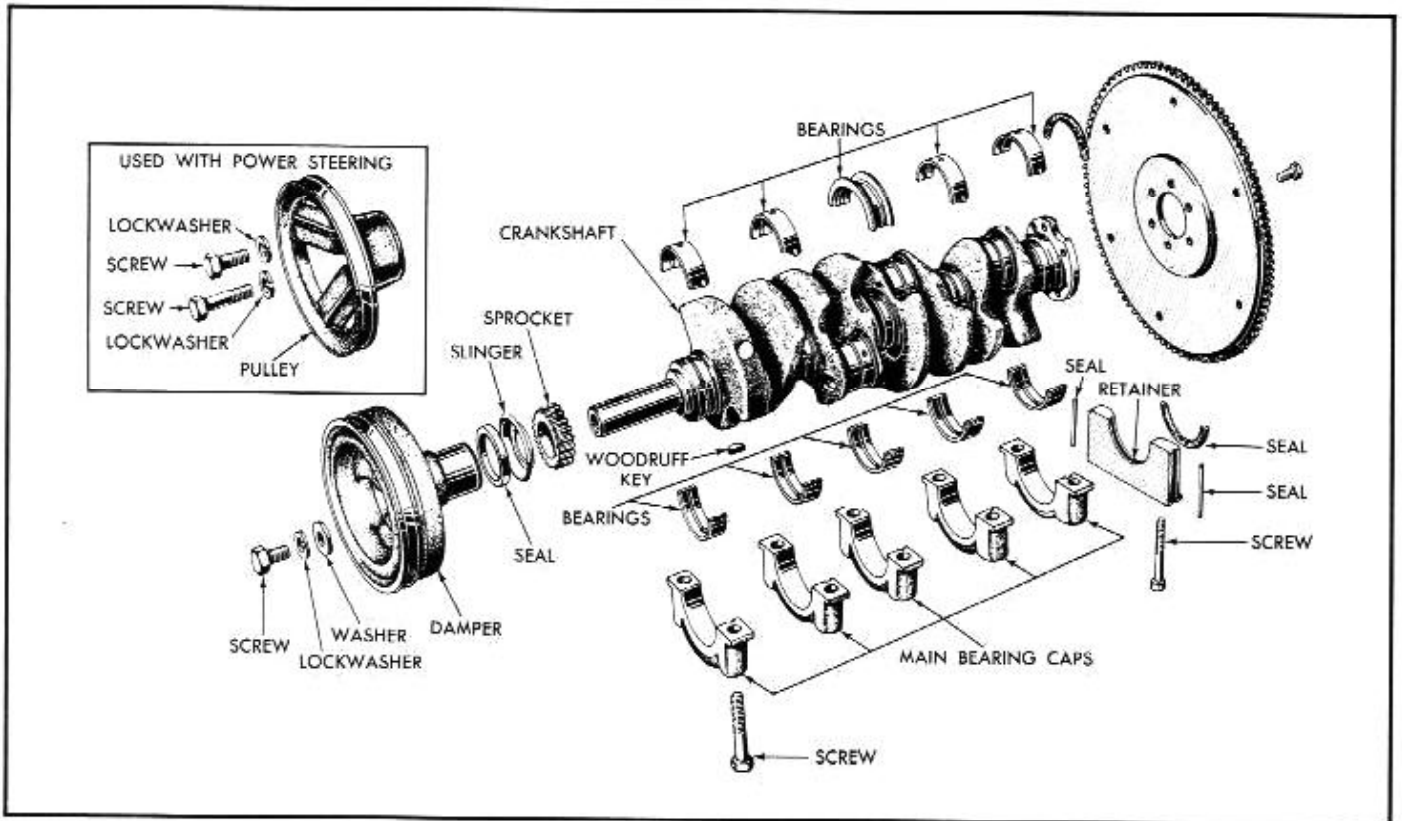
A-101—Crankshaft, Flywheel and Related Parts
